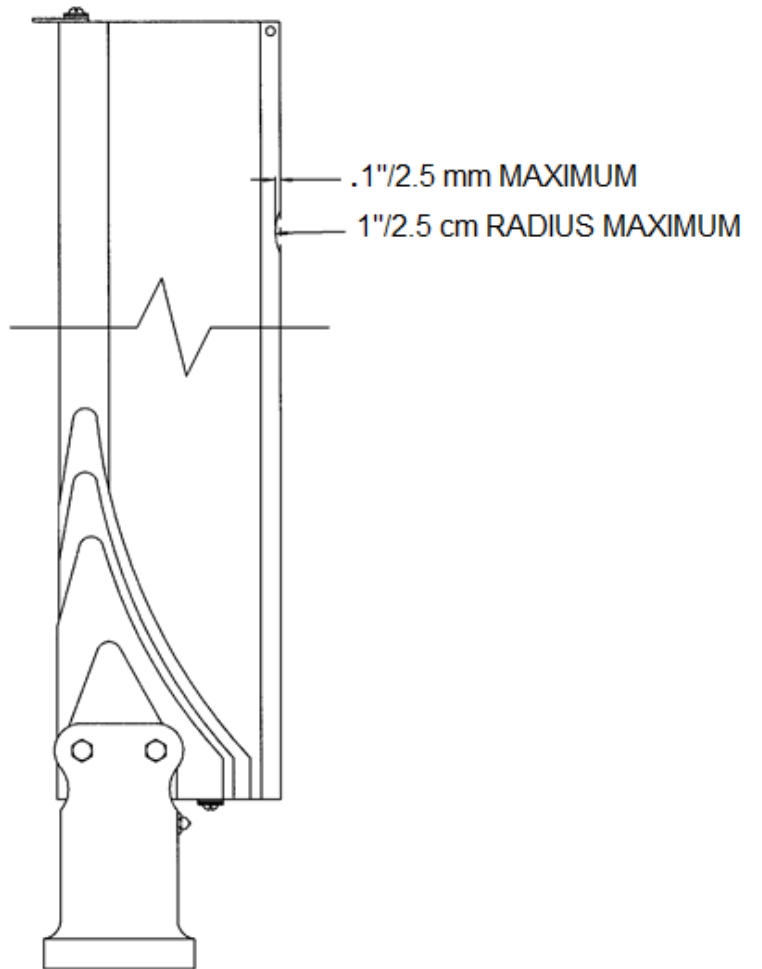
Tail Rotor Blade Trailing Edge Repair Limits
